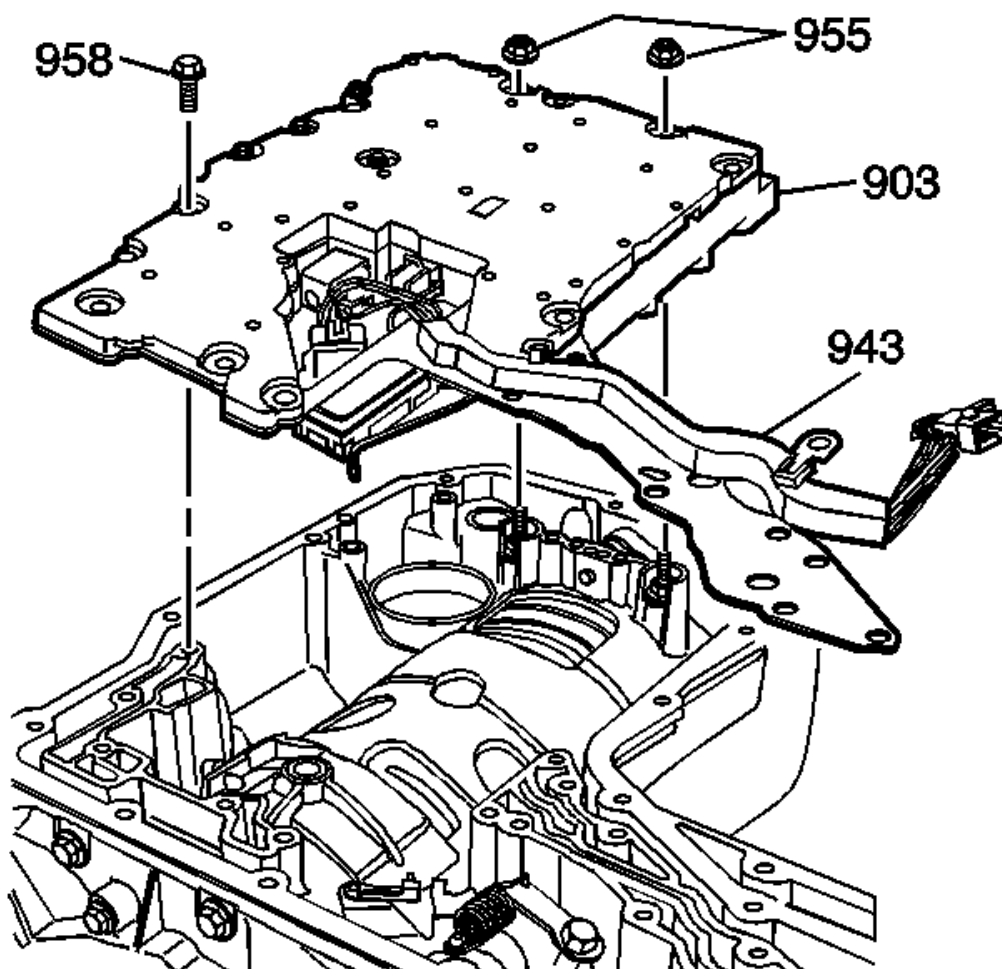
Identifying Lower Channel Plate, Control Valve Body And Accumulator Assembly, And Lower Control Valve Body Wire Harness Extension
